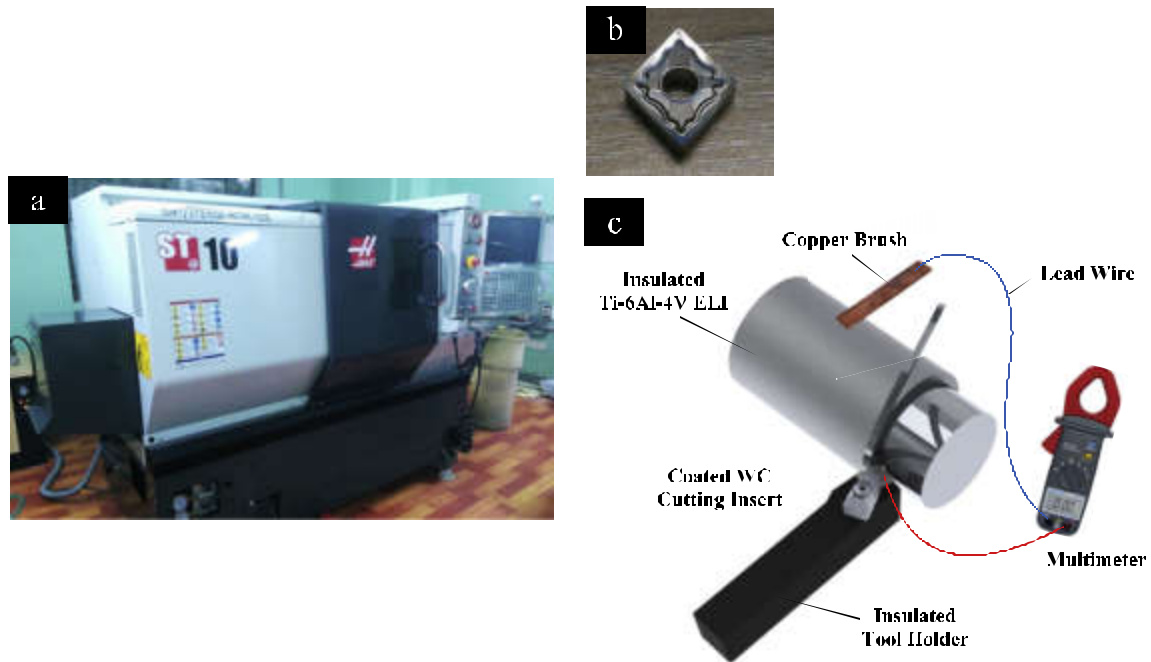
(a) Haas ST10 CNC turning machine, (b) CNMG 120408-AK H01 coated WC cutting insert, and (c) tool-work thermocouple setup for chip-tool interface temperature measurement.
